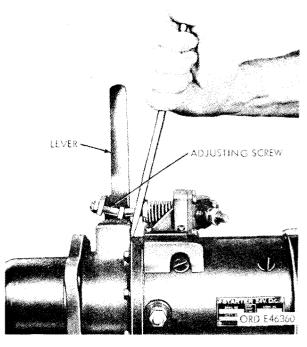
Head of adjusting bolt resting against blade and plunger rod.
